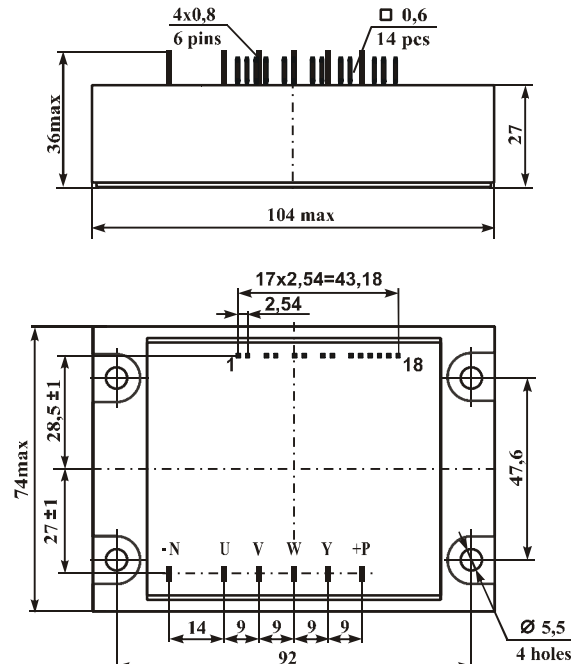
Overall drawing of modules M13C-30(50,90)-6(12)
